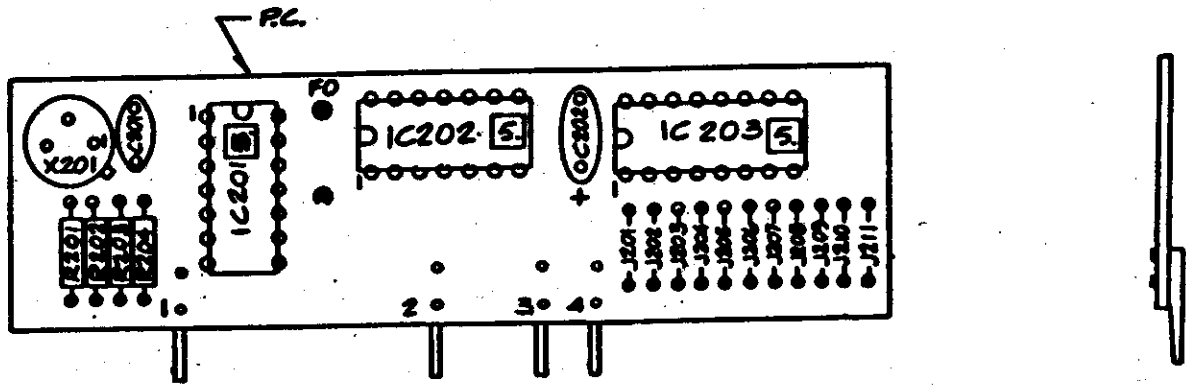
Printed Circuit Board (PC2) Assembly for Plug-In FDT Transmitter
